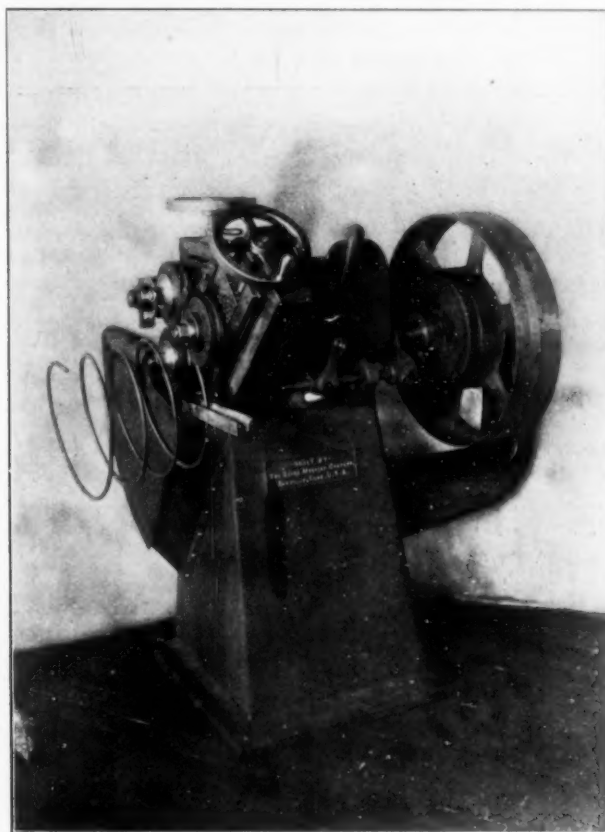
BAIRD CONTINUOUS SPRING COILING MACHINE.
